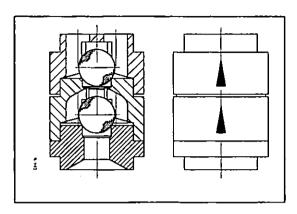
Double Ball Valve - Sectional and Plan View
